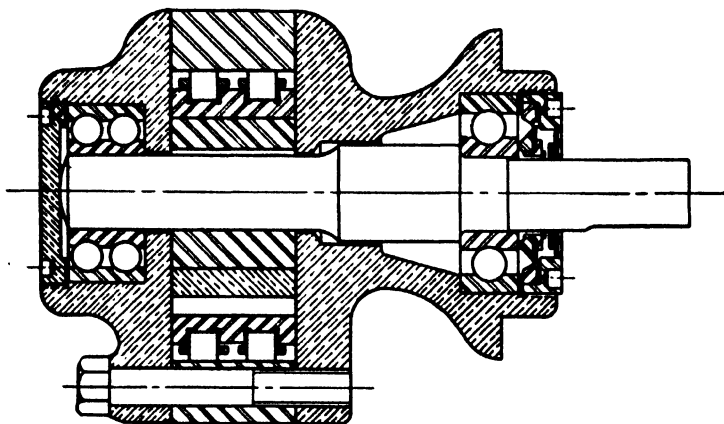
Section of Rota Roll pump. (*Sundstrand Machine Tool Co., Rockford, Ill.*)
